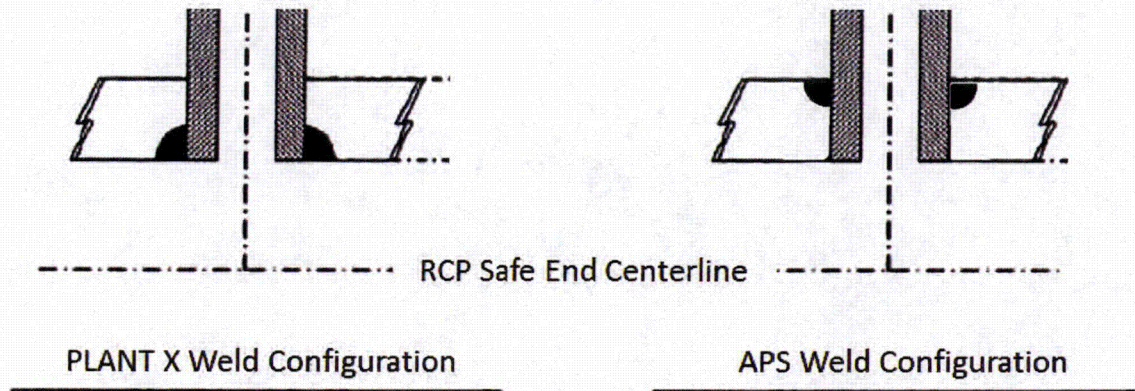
PLANT X and Palo Verde Unit 3 Instrumentation Nozzle Layout
